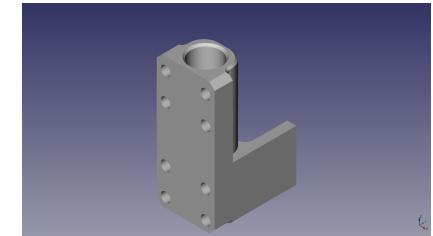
Begonia 3D Printed Extruder Mt Top Double Bearing Holder Render
